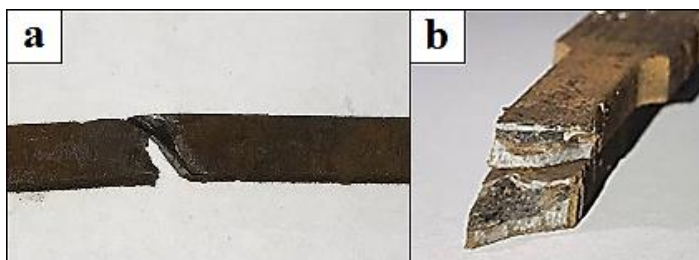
Fracture of one of the A5 tensile test specimens (a): fracture mode (b): cross-section of fracture.
